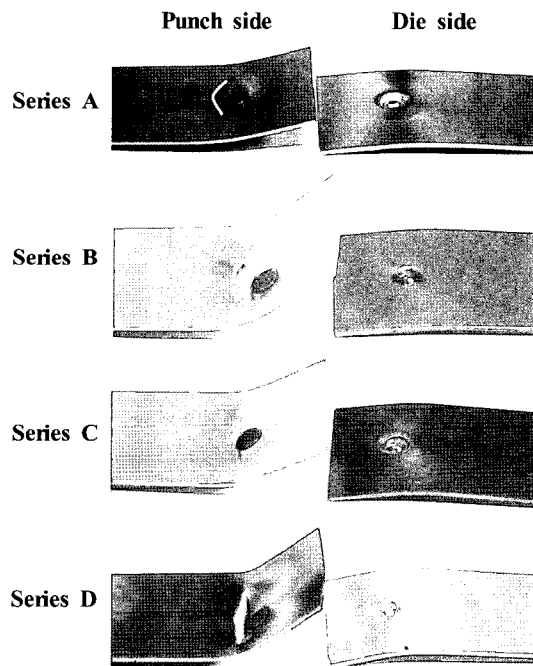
Tested lap-joint specimens indicating the mode of failed rivet(fatigue test)
